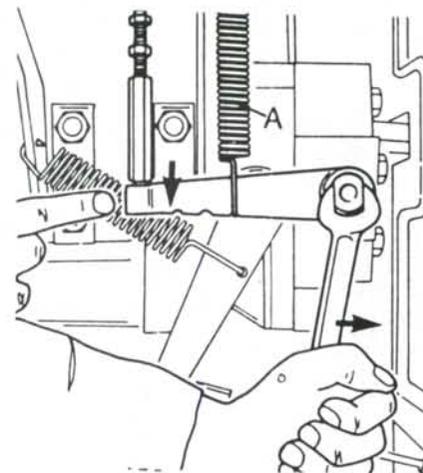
Use a wrench to move transmission clutch cross-shaft lever until release bearing is against thrust plate when adjusting clutch free travel on 1490 and 1690 models equipped with high platform or cab.
